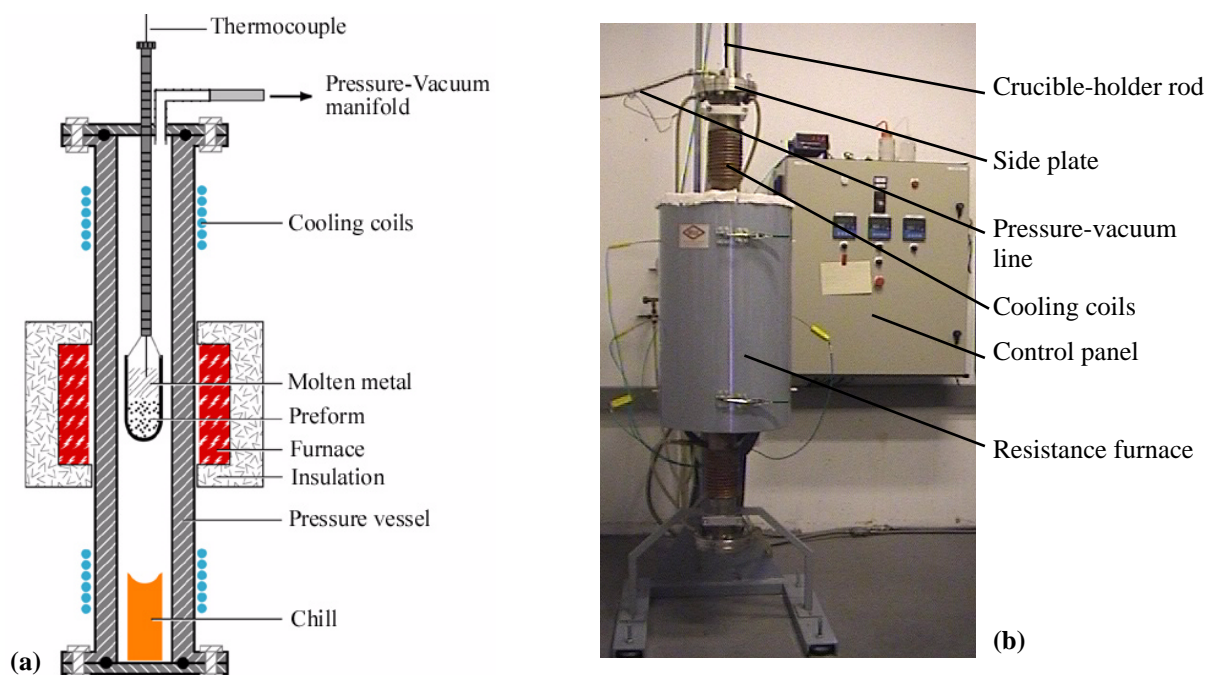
Gas-pressure infiltration machine used for composite fabrication. (a): schematic cross-sectional view; (b): overall picture of the apparatus. The furnace height is about 0.8 meter.
